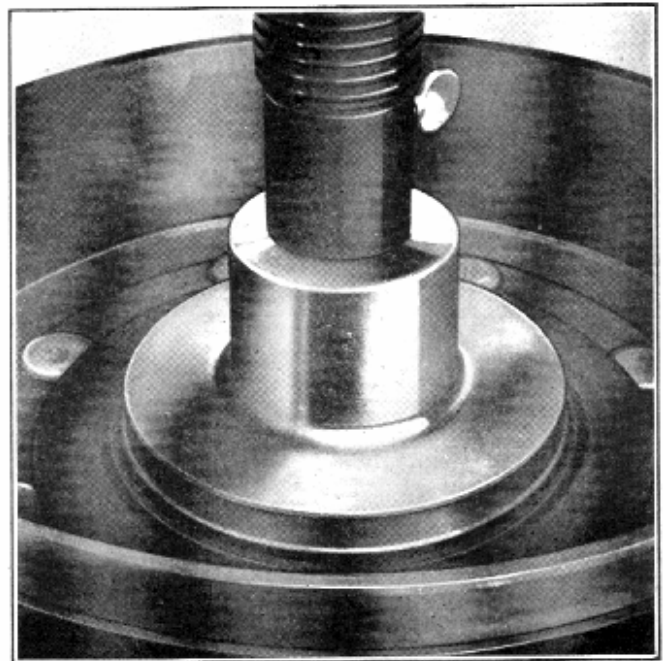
Installing Front Hub Oil Seal Tool No. XG-19847
